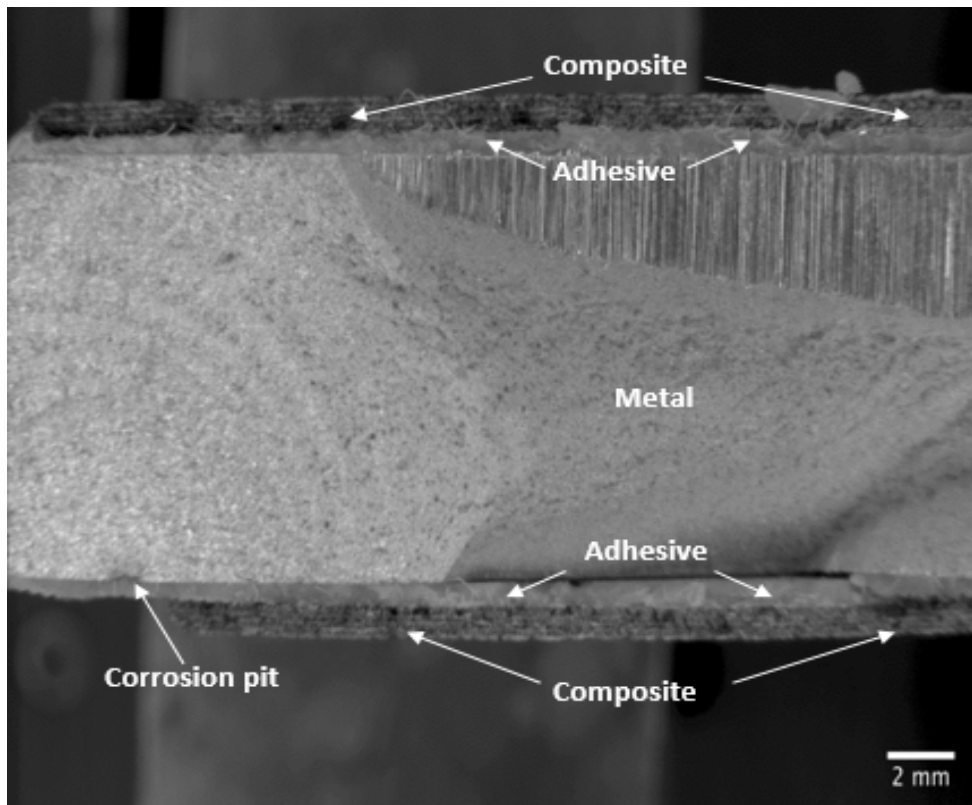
Fracture surface of corrosion-pitted specimen (right-hand side of Figure 13) showing a surface corrosion pit which initiated a subsequent fatigue crack. (The vertical marks in the top right of the specimen were introduced during preparation of the surface for inspection after failure and are an artefact.)
